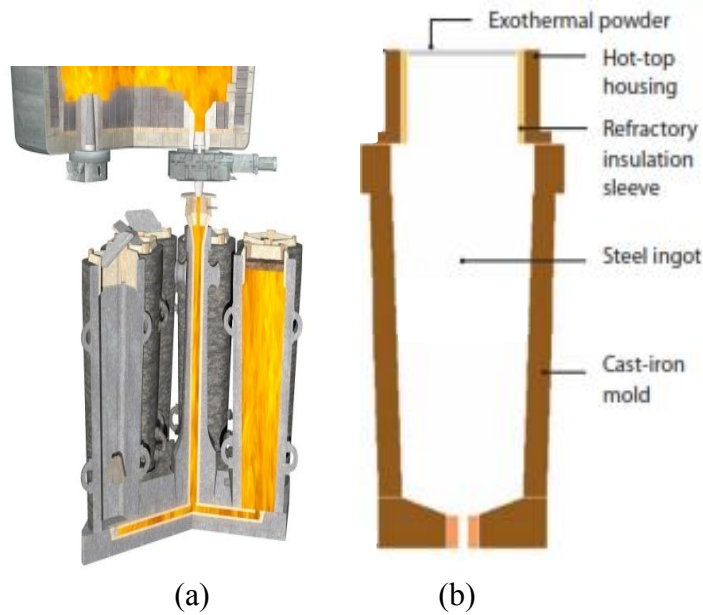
Ingot casting: (a) ingot production by bottom pouring [13] and (b) a typical casting mold with a trapeze form wall [14].
